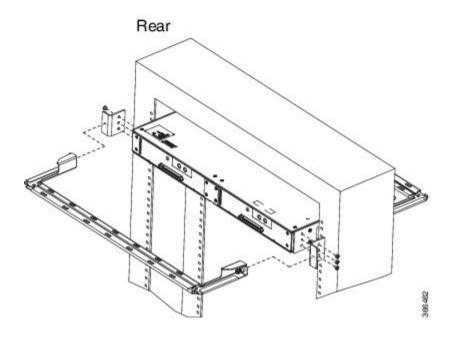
Attaching 21-inch Brackets to Patch Panel - Single
